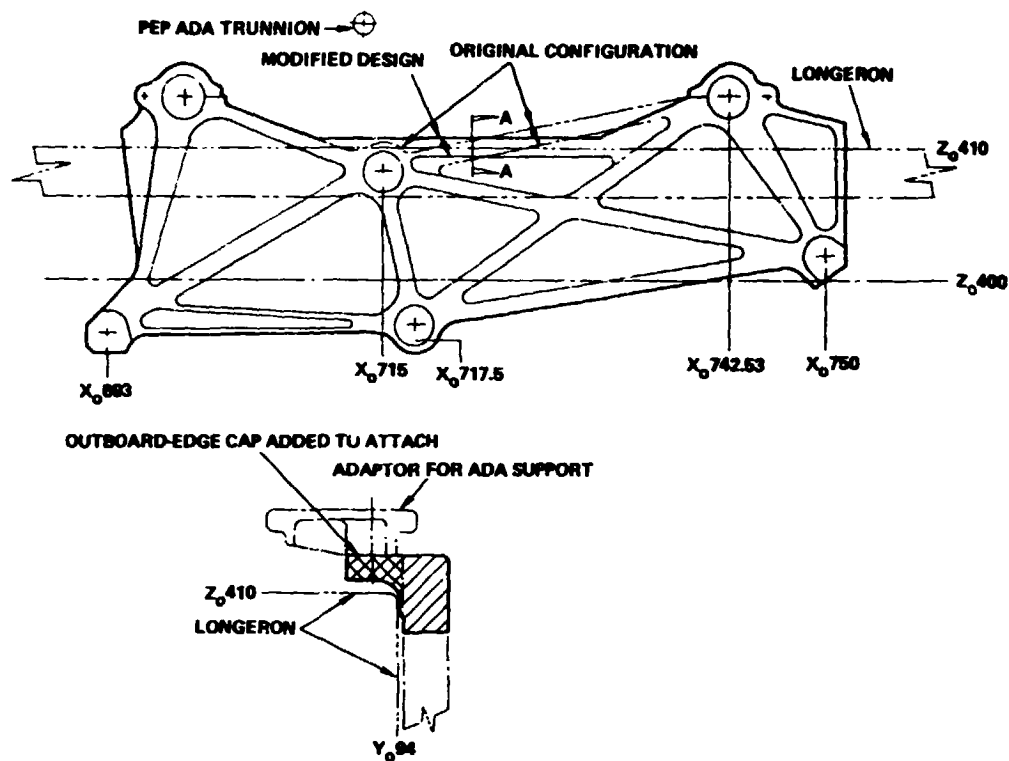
Custom Lightweight Bridge Fitting for Short Tunnel
